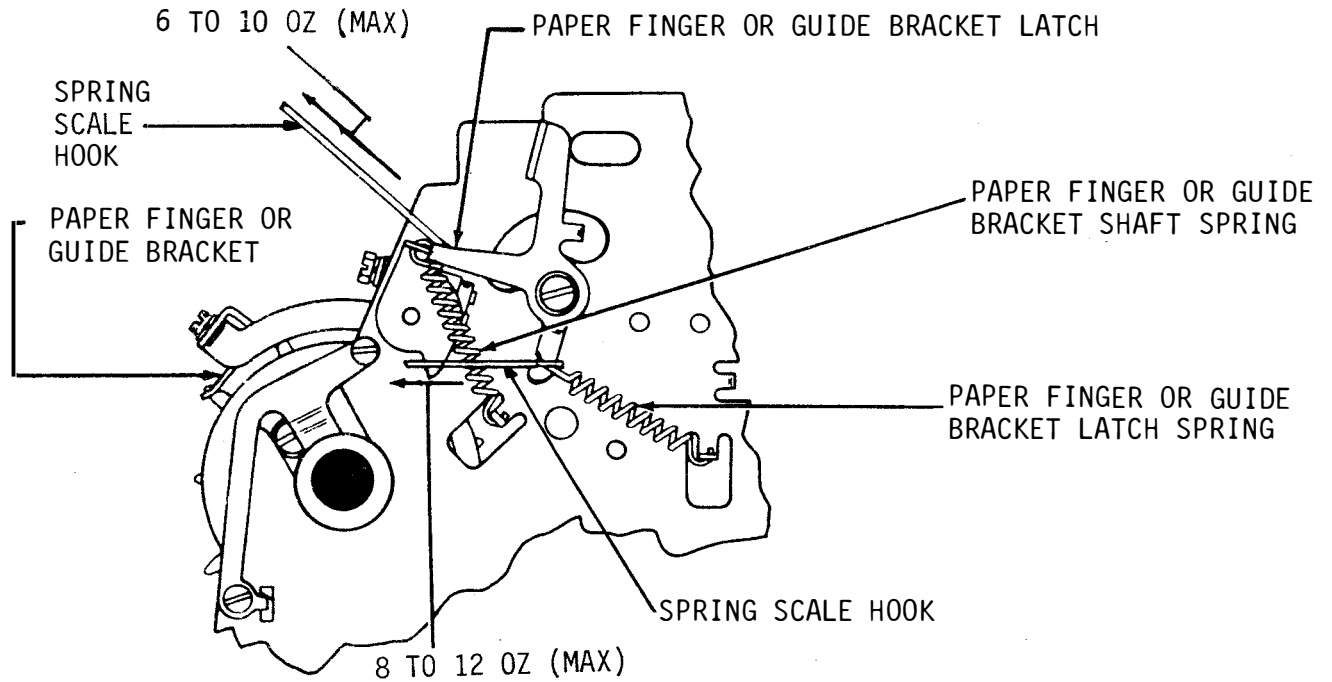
Paper Finger or Guide Bracket Shaft Spring and Latch Spring (Sprocket Feed)
